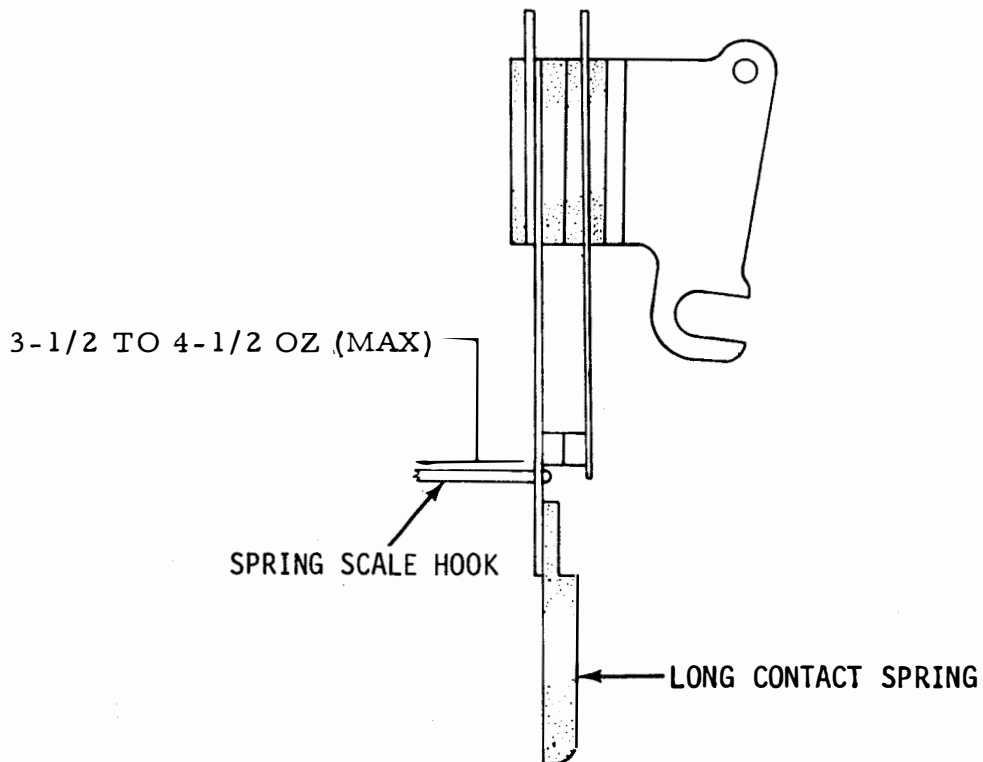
Transmitter Control Contact Spring, Left Side View
